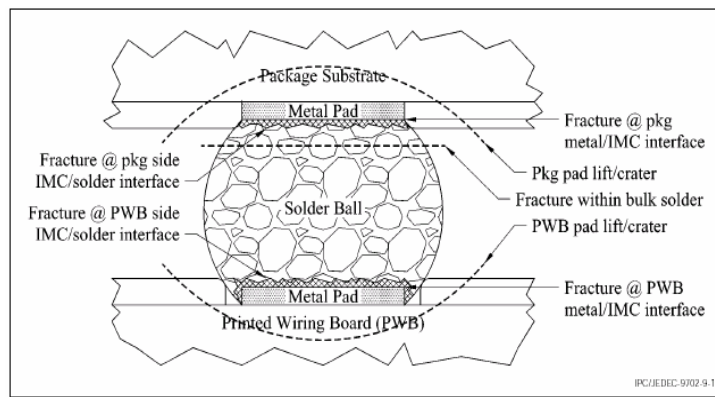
Interconnect Fracture Modes (Solder Ball Array Devices)
